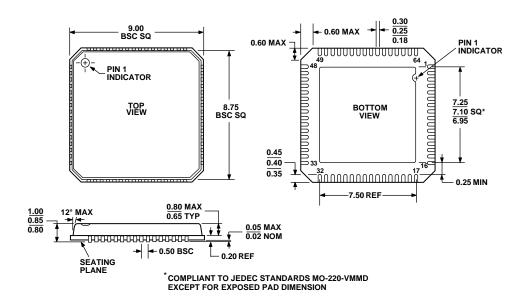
64-Lead Lead Frame Chip Scale Package (LFCSP) [CP-64-3] Dimensions shown in millimeters
